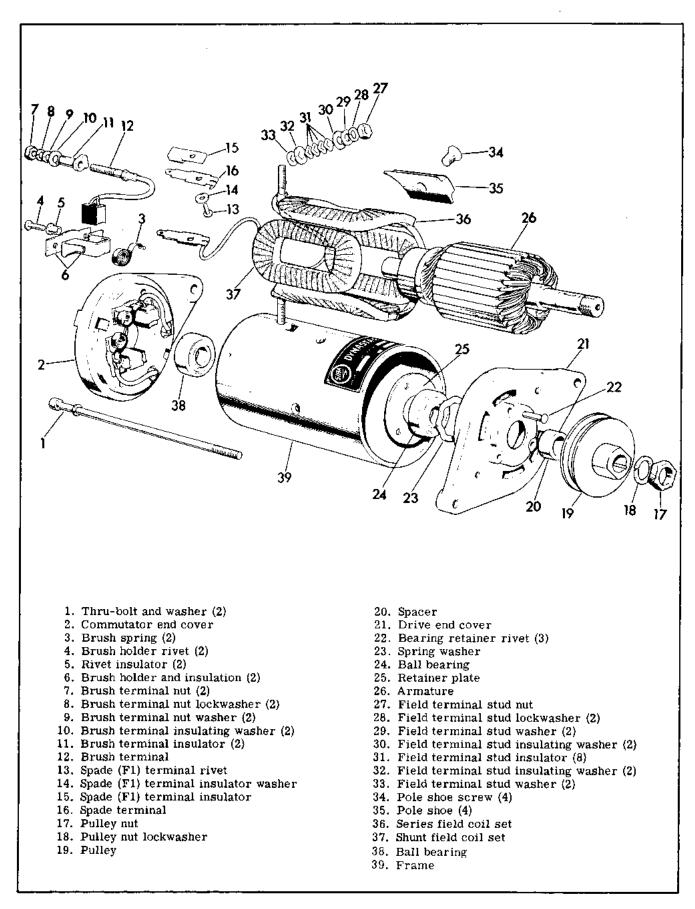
E-27G. SIBA Starter-Generator - Exploded View
